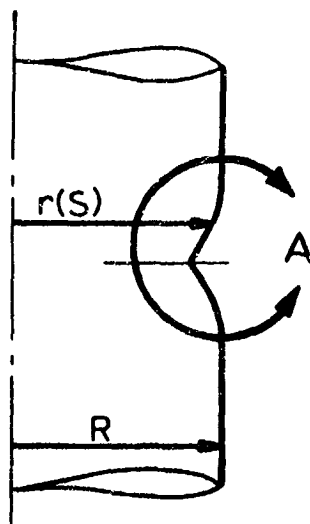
Weld Sinkage (Slope Discontinuity)
